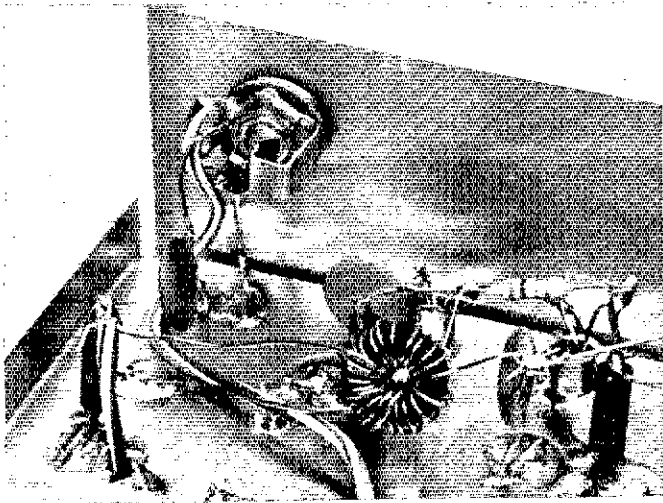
Close-up view of the assembly technique discussed in this article. Components are soldered to the circuit-board material and used as tie points.
